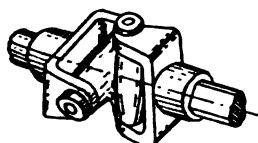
Universal Joint, also called Cardan Joint—note straight line.
